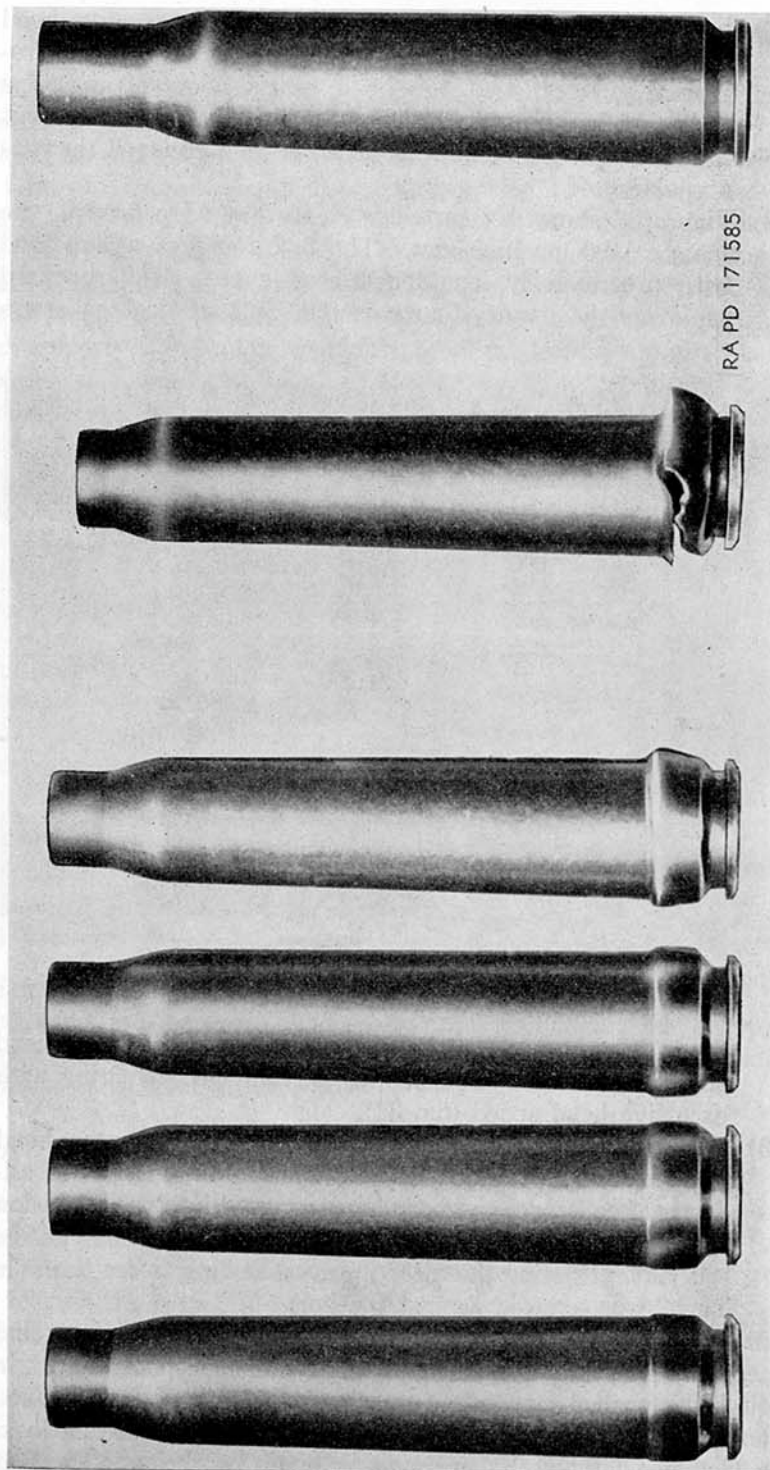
Cases of cal..50 machine gun fired with and without excessive head space.
